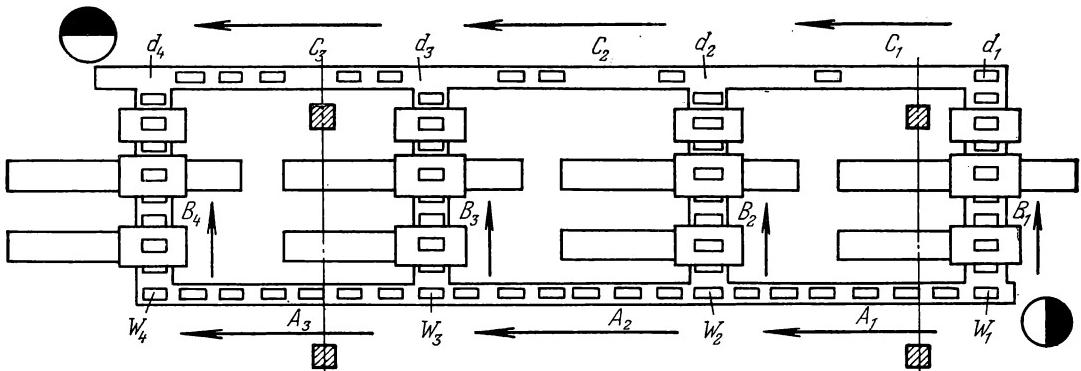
Transfer machine incorporating four flow lines for machining the cylinder blocks of tractor engines
